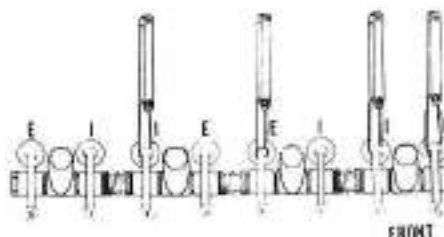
On four-cylinder engines, adjust intake and exhaust valves of No. 1 cylinder, exhaust valve on No. 2 cylinder and intake valve on No. 3 cylinder when No. 1 piston is at TDC on compression stroke. Refer to Fig. 41.
